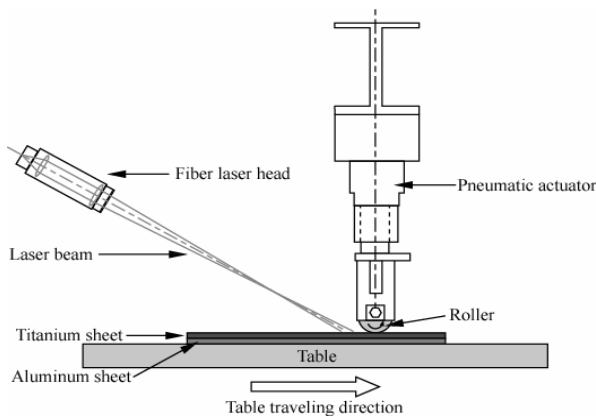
Setup of Laser Roll Welding using Fiber laser
